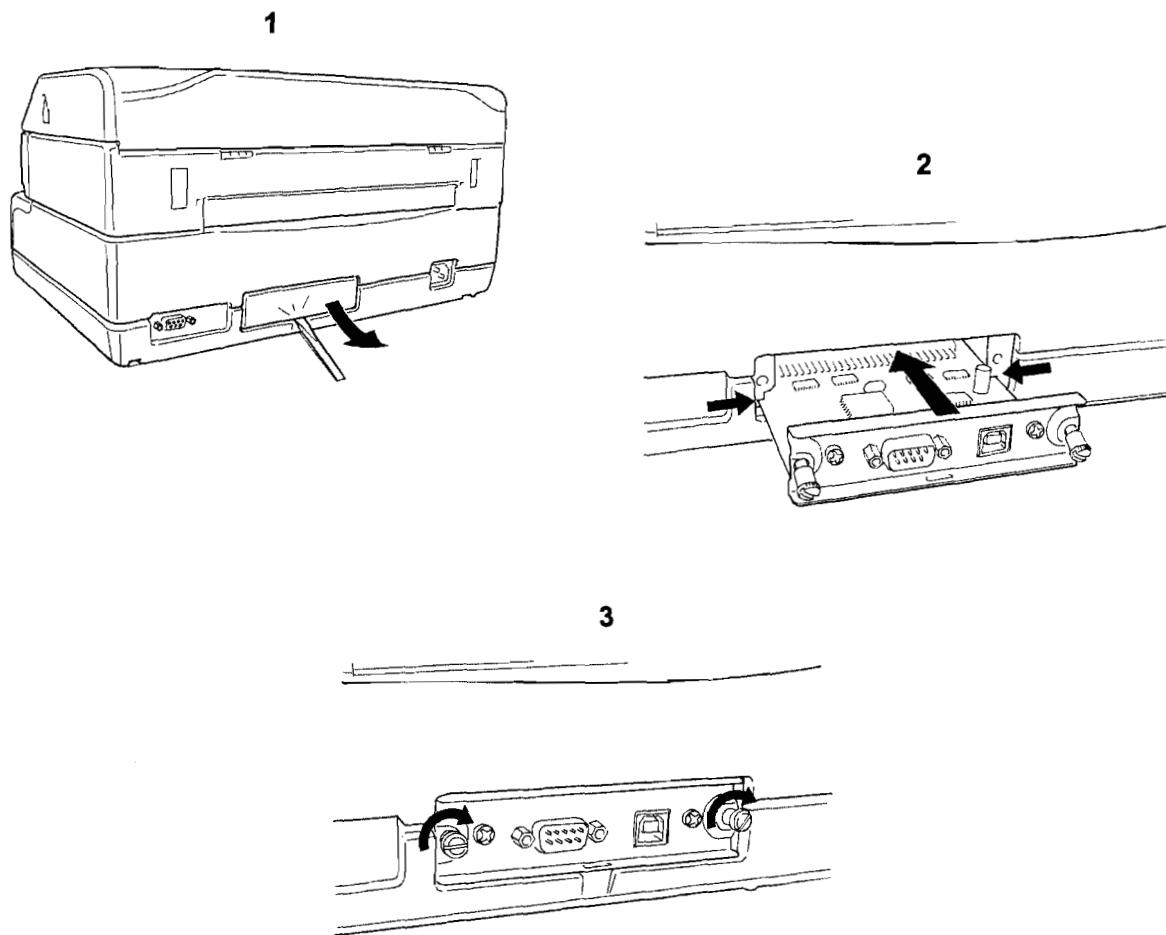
Installing the Serial Interface + USB Interface Card
